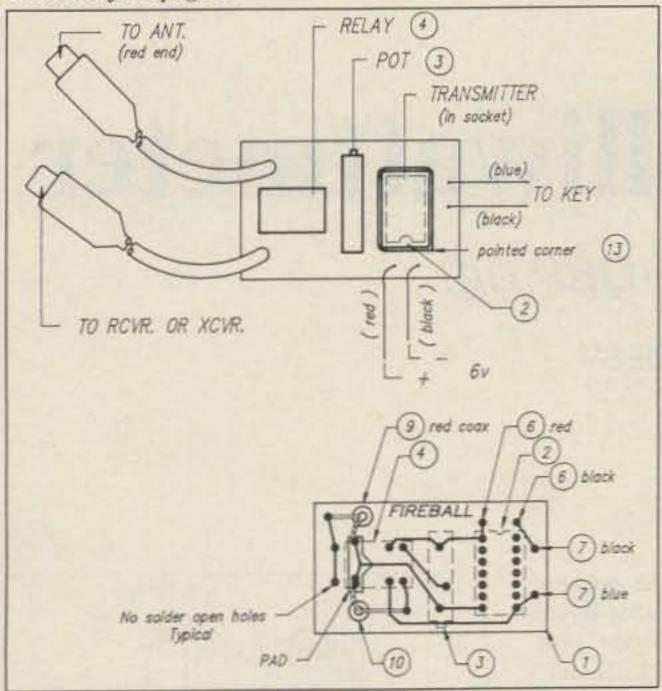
(a) Parts placement (top view) and (b) parts placement (bottom view).
